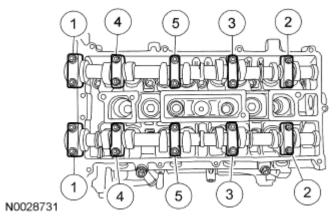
Locating Camshaft Lobes Courtesy of FORD MOTOR CO.
